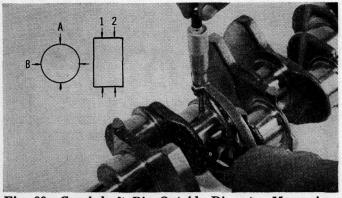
Crankshaft Pin Outside Diameter Measuring Points
